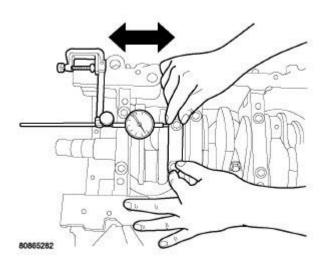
CHECKING CRANKSHAFT END PLAY Courtesy of CHRYSLER LLC
